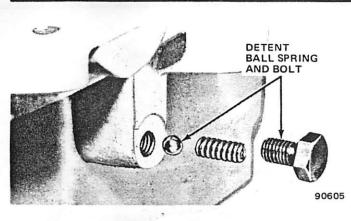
D-10 Detent Ball, Spring and Bolt Removal/Installation
